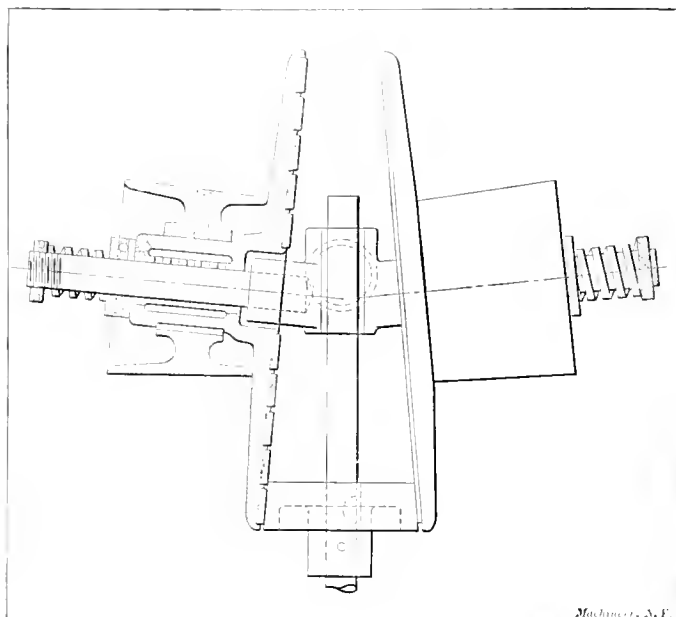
Friction Feed Disks and Mounting of Idler Pulleys
